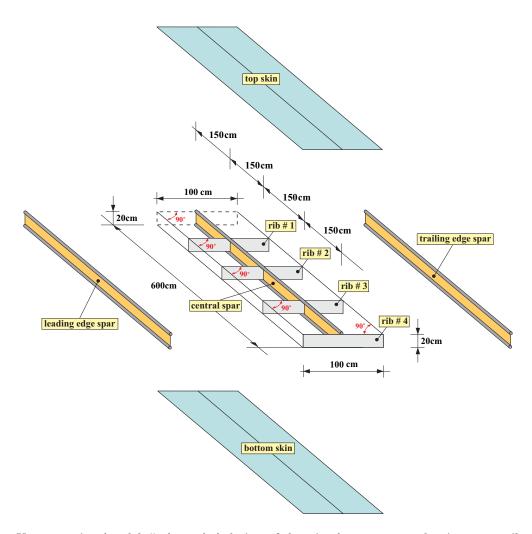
Unswept wing (model # 1): exploded view of the wing box structure showing spars, ribs, and top and bottom cover panels.
